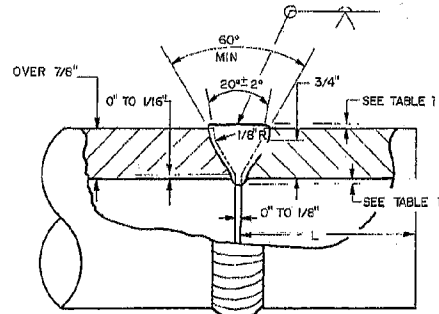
Butt Joint, V-Grooved, Welded with Consumable Insert Ring
